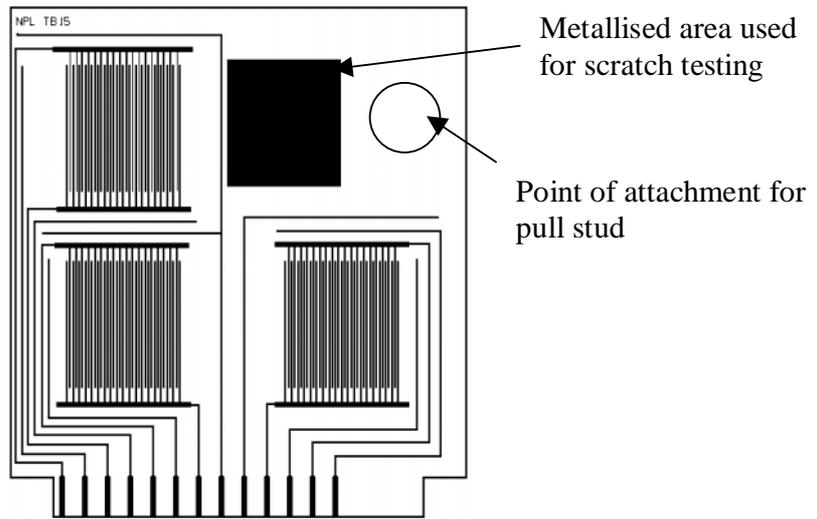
Test board showing the SIR double comb patterns and the areas used for butt tension testing and scratch testing.
